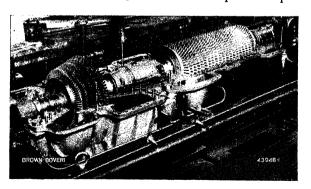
Charging set for a compressor output of 4400 kW, composed of an axial compressor, a gas turbine and a generator, which restitutes about 900 kW to the electric supply system.
